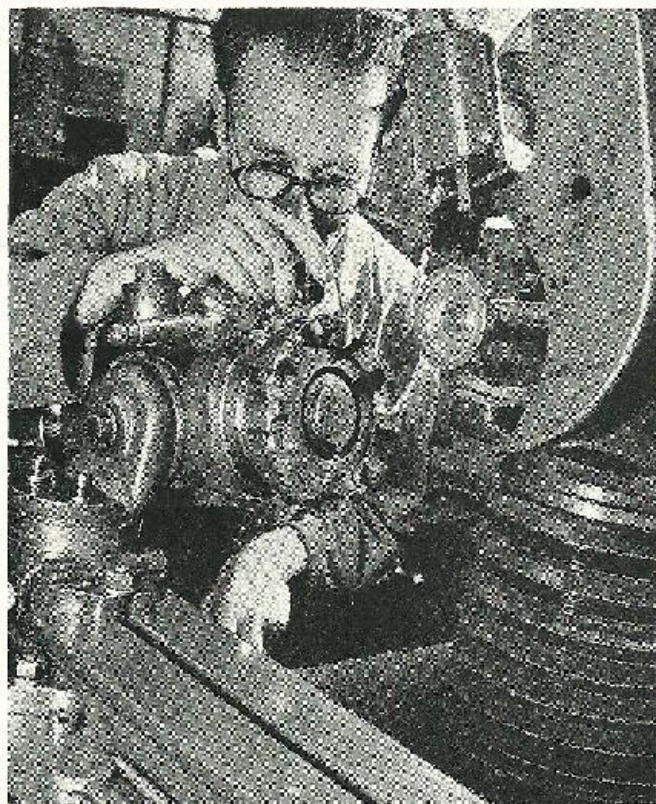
The precision diamond lapping of one of the latest hard metal milling cutters
